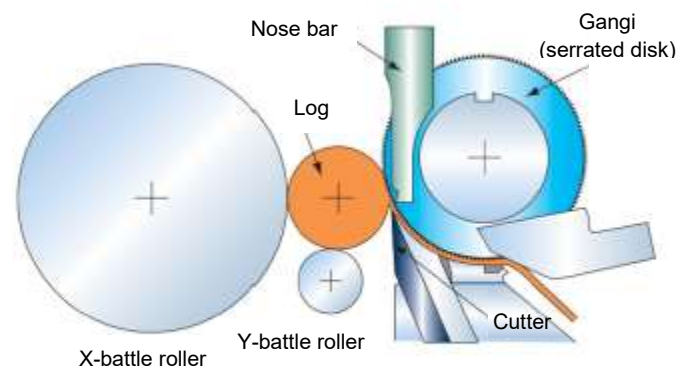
Mechanism of a Rotary Lathe (Spindle-less System)
